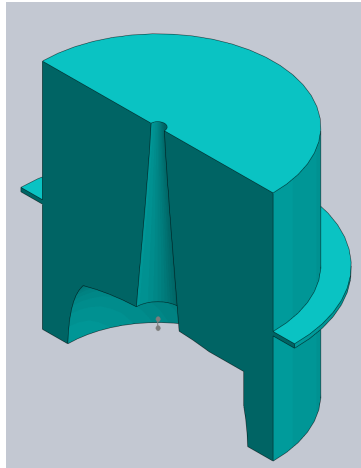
Cross-sectional view of Solidworks model of the front cuff.
